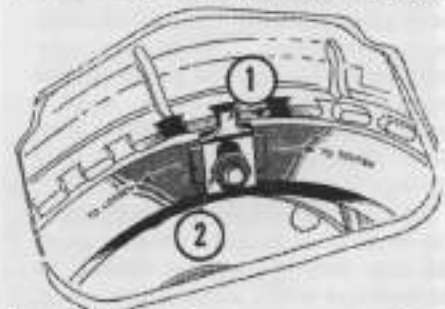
Over-center type clutch, showing points of adjustment. To tighten clutch, release the adjusting ring lock (1) and turn the adjusting ring clockwise.
